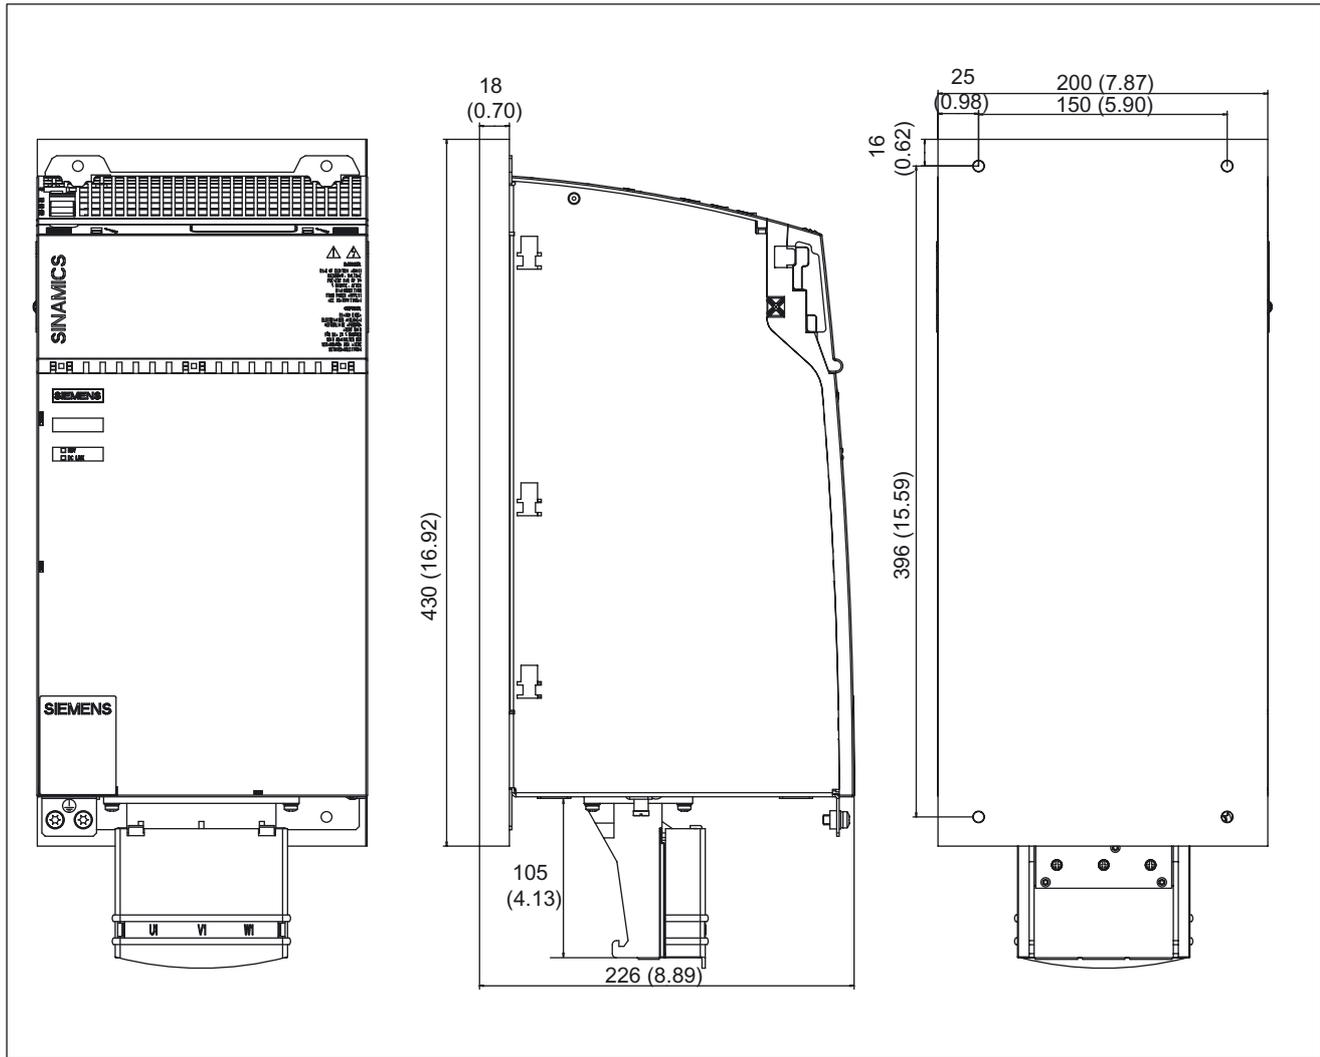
Dimension drawing of Basic Line Module with cold plate (100 kW), all dimensions in mm and (inches)
